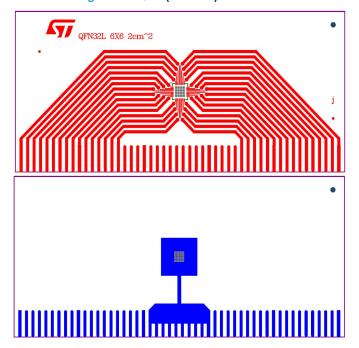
QFN (6x6 mm) PCB 2 cm<sup>2</sup>
